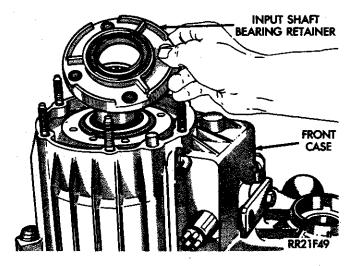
Removing/Installing Input Gear Bearing Retainer
